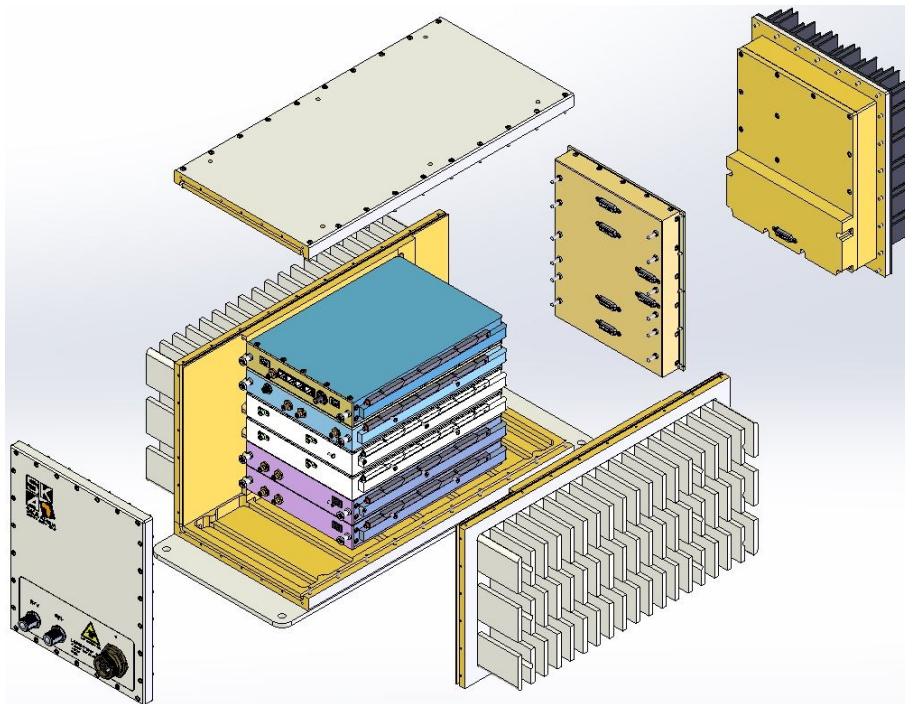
Exploded view of the Digitiser enclosure concept design.
